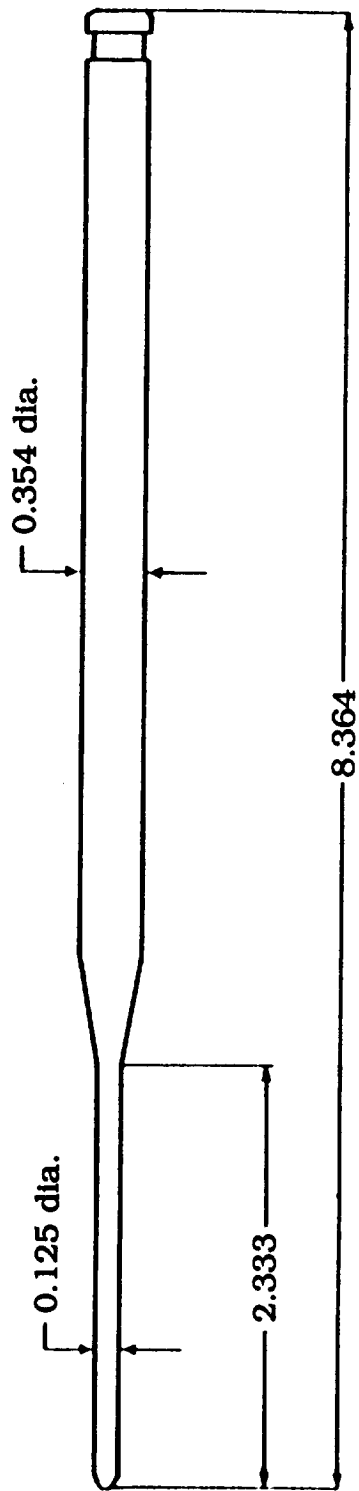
Test section flowfield survey rake and translating support sting assembly. (Dimensions in inches.)
